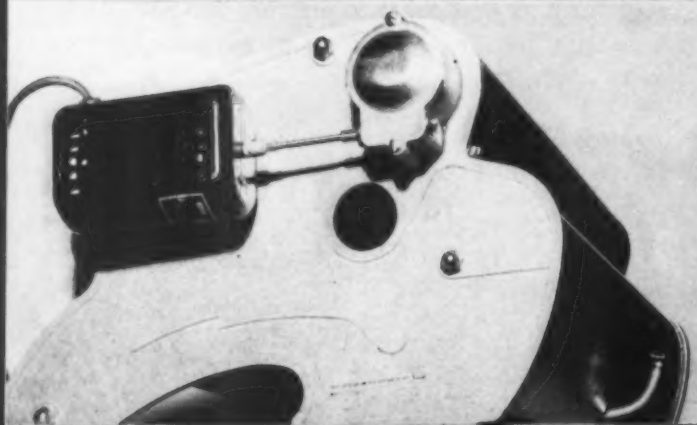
Motor-driven flexible-shaft coupling integrated with worm drive-shaft
